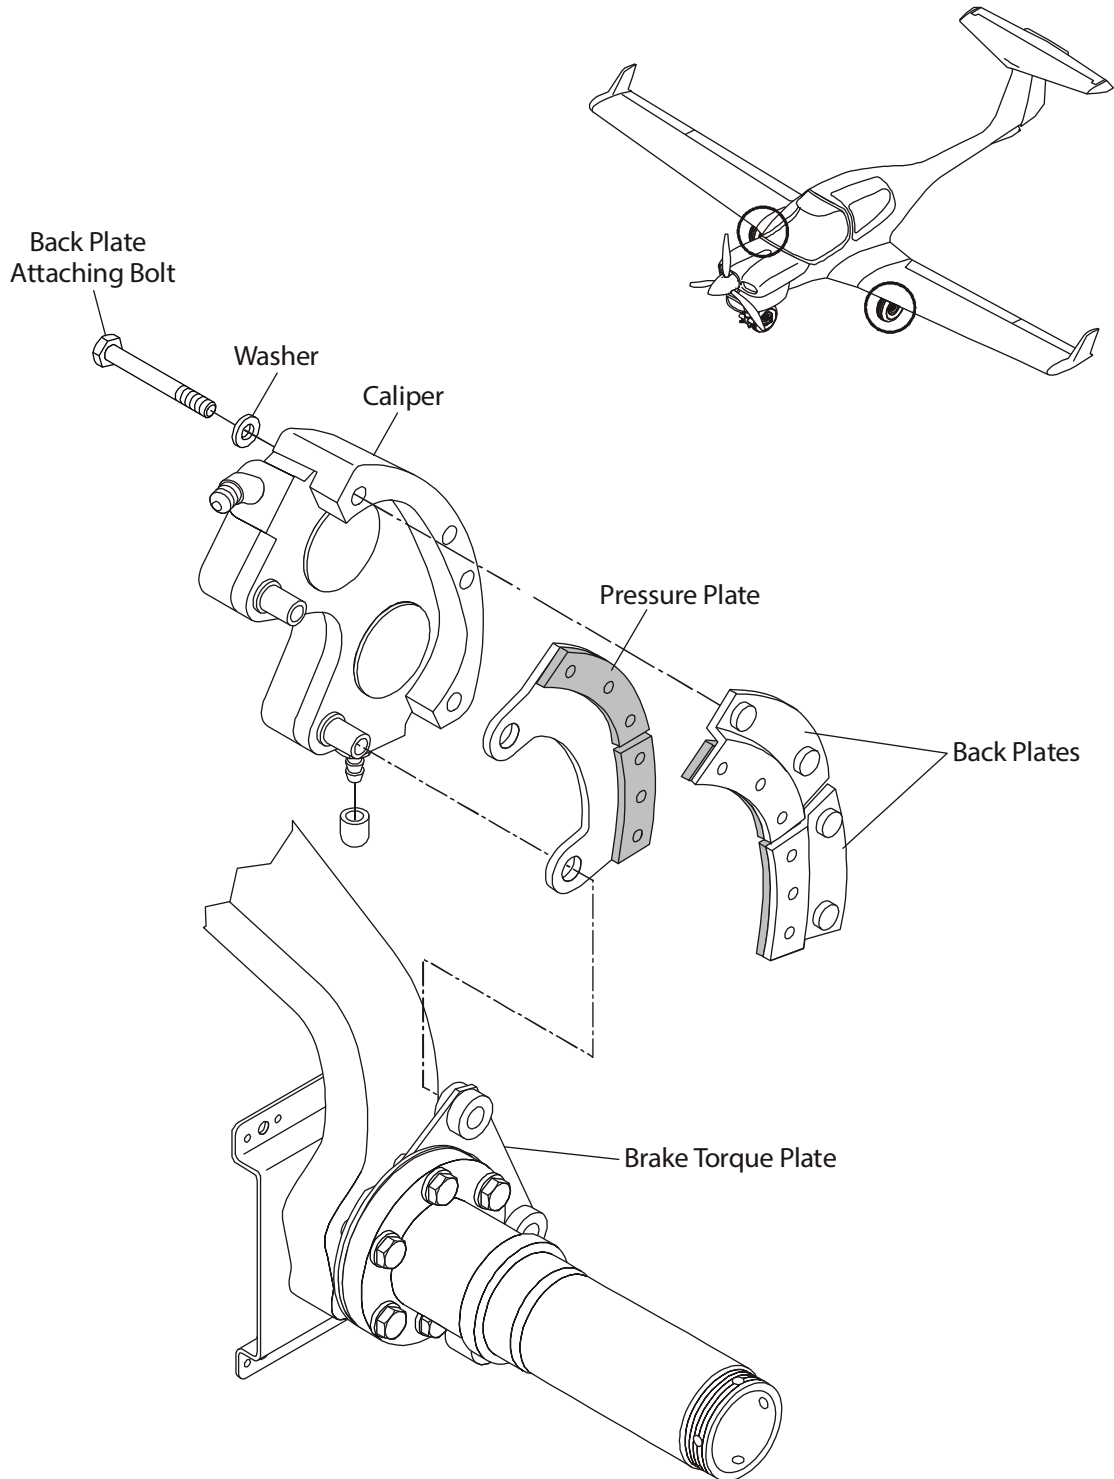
Wheel Brake Assembly (if OÄM 40-334 is installed)
